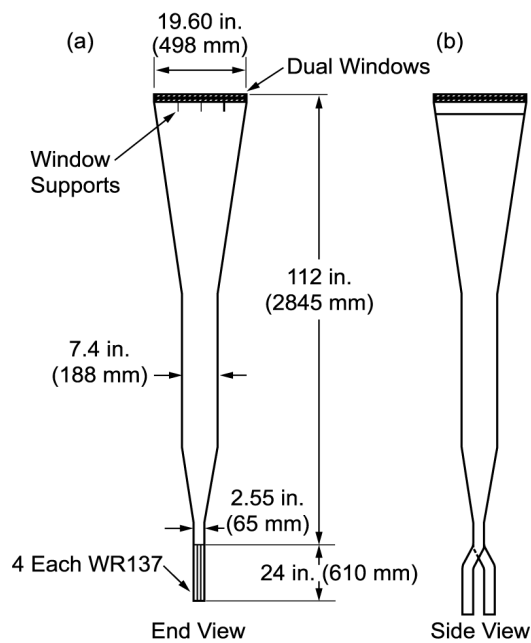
Important dimensions of the feed horn: (a) end view and (b) side view.
